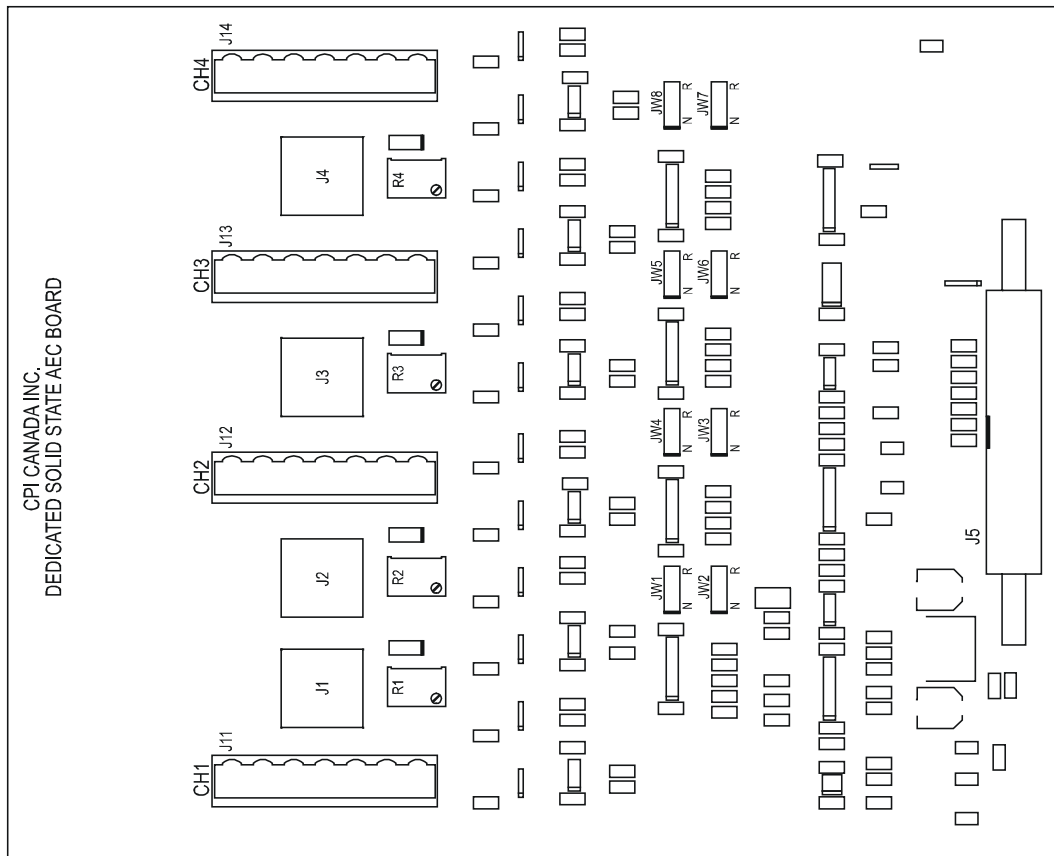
Dedicated solid-state AEC board (assembly 737992)
